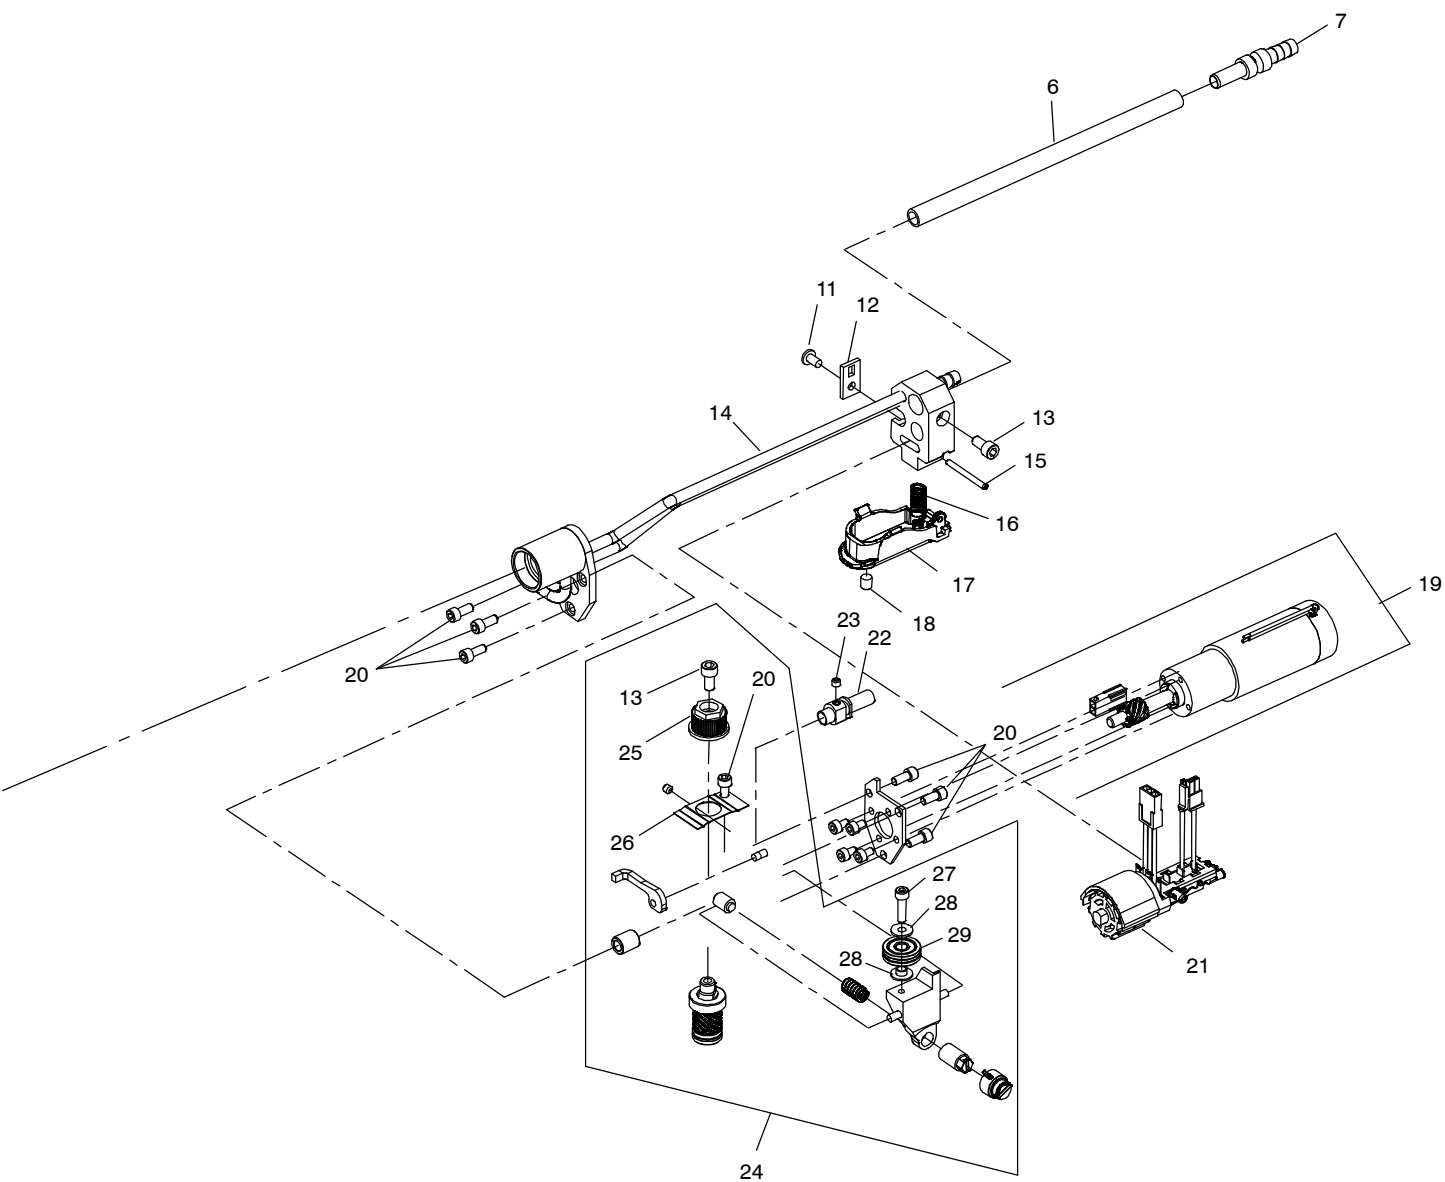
Exploded View Of XR Aluma-Pro Lite Gun
